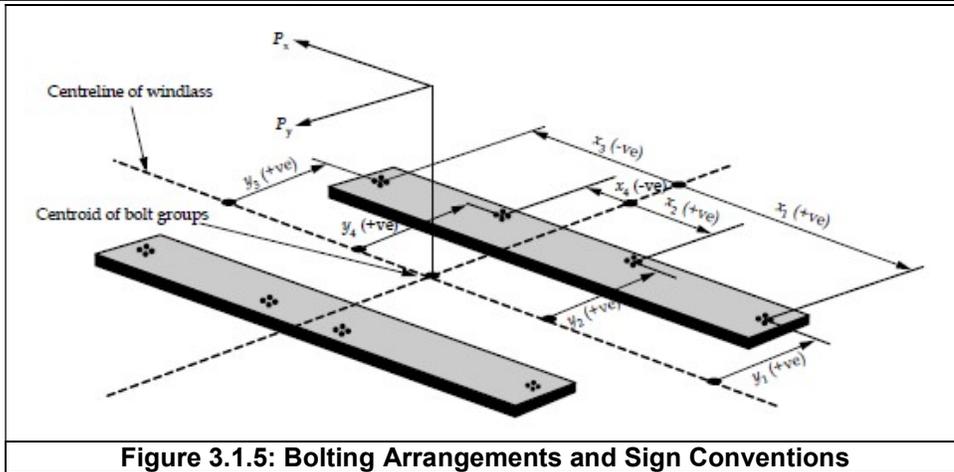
Bolting Arrangements and Sign Conventions
